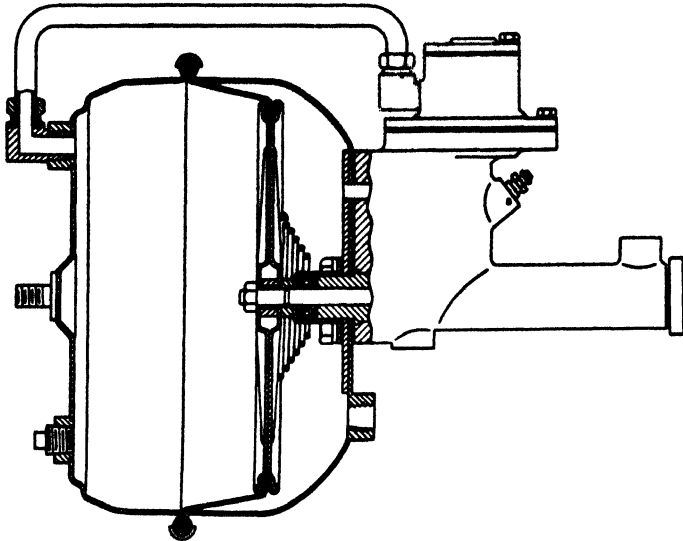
PART-SECTIONAL VIEW OF MIDLAND HY-POWER UNIT.
